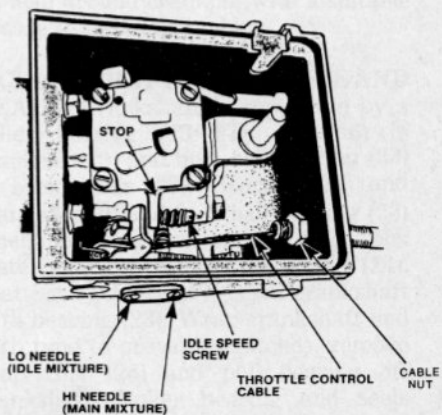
A—View of brushcutter air box. Outside throttle cable nut is not shown.
